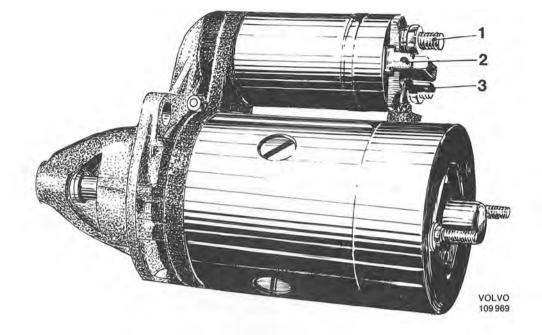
Starter motor + from battery 2. Terminal 16 (to ignition coil terminal 15) 3. Terminal 50 (to ignition switch)
